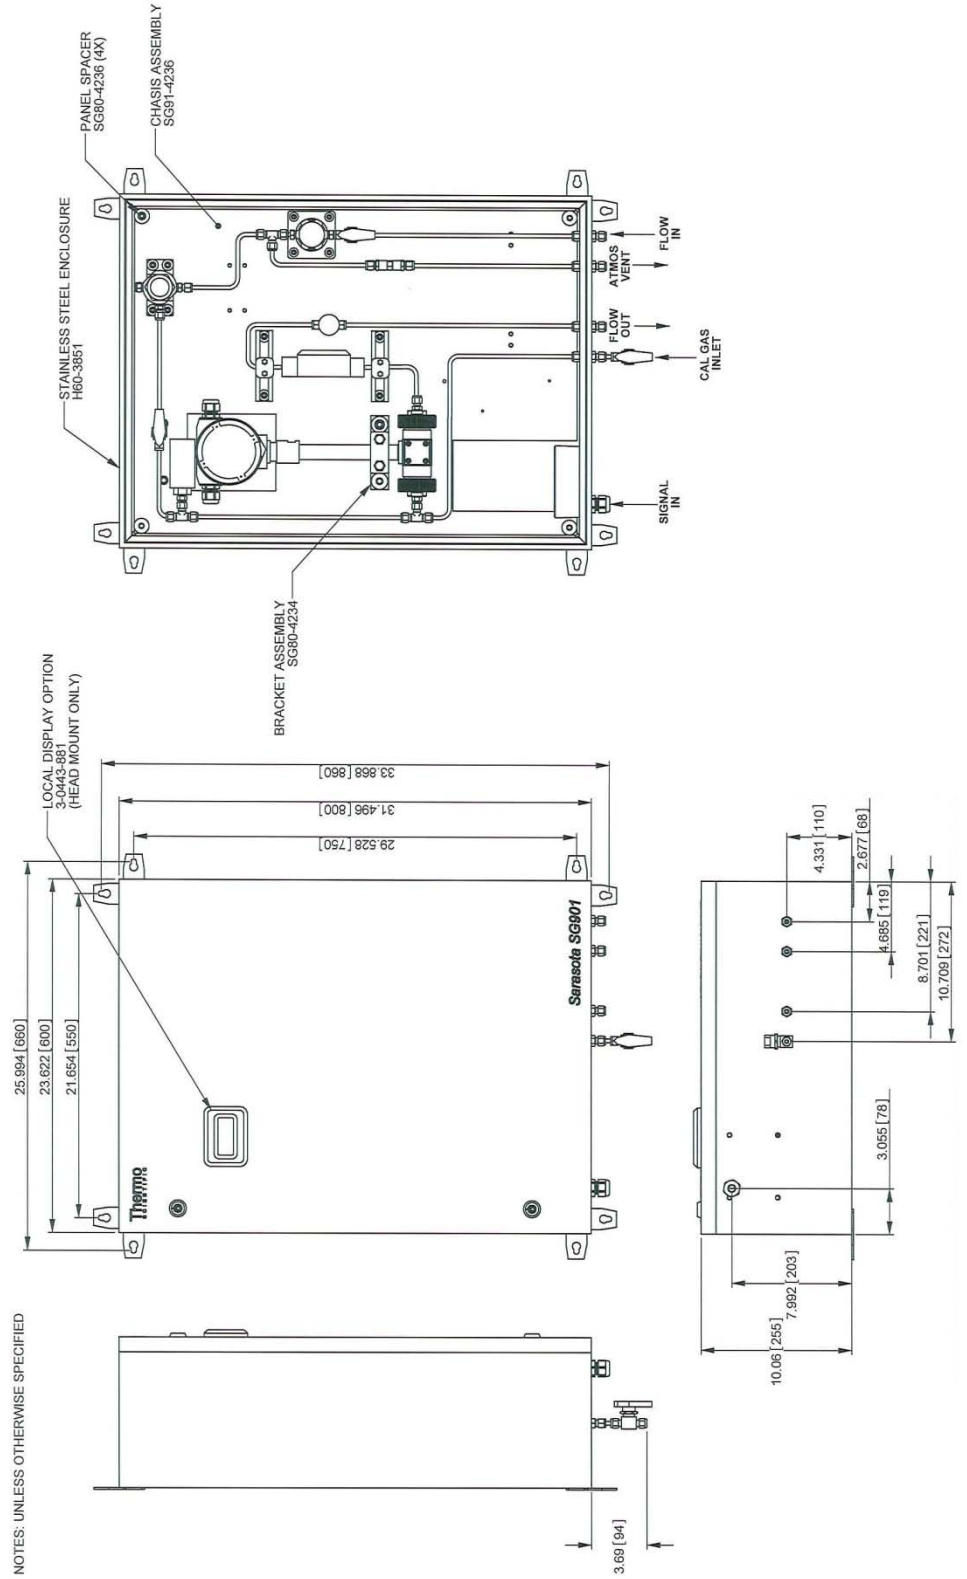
SG91-6001: General assembly drawing, dry gas system (sheet 1 of 3)
